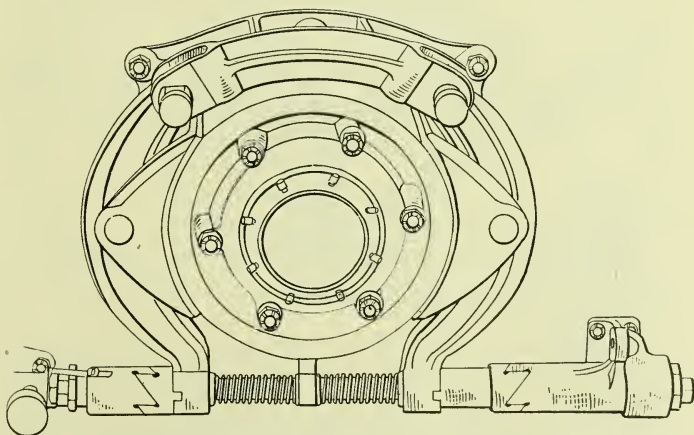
THE PIERCE-ARROW BRAKE USING A RADICAL CAM
